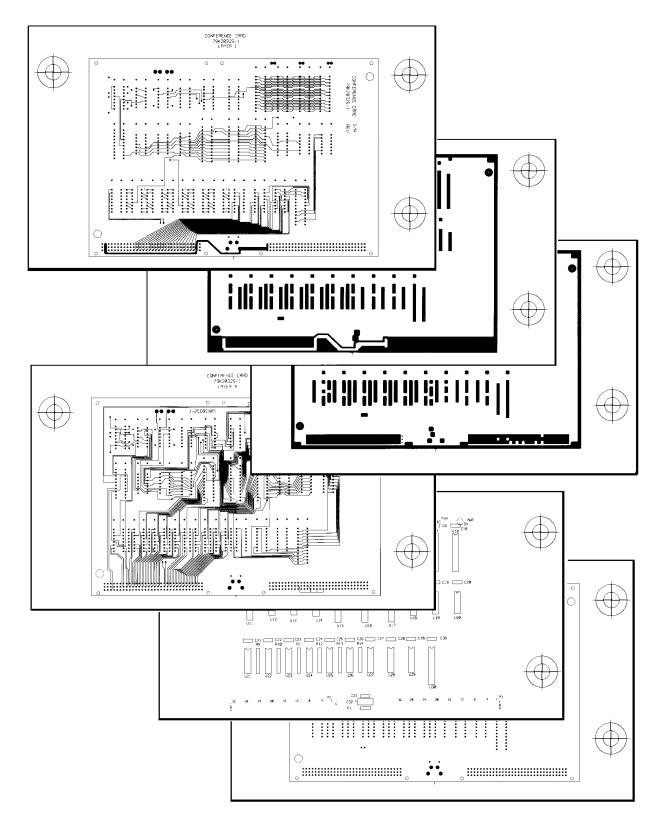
Typical Printed-Wiring Master Pattern Drawing
